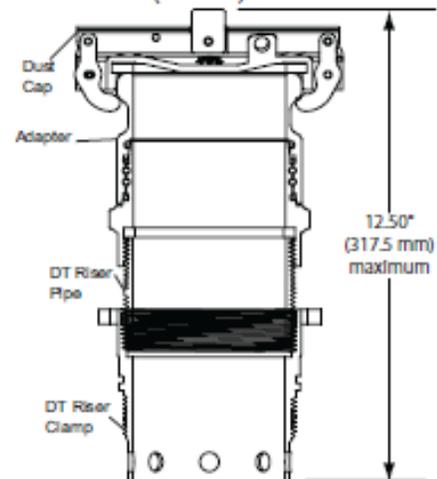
Drop Tube (DT) Riser Clamp Assembly Dimensions
